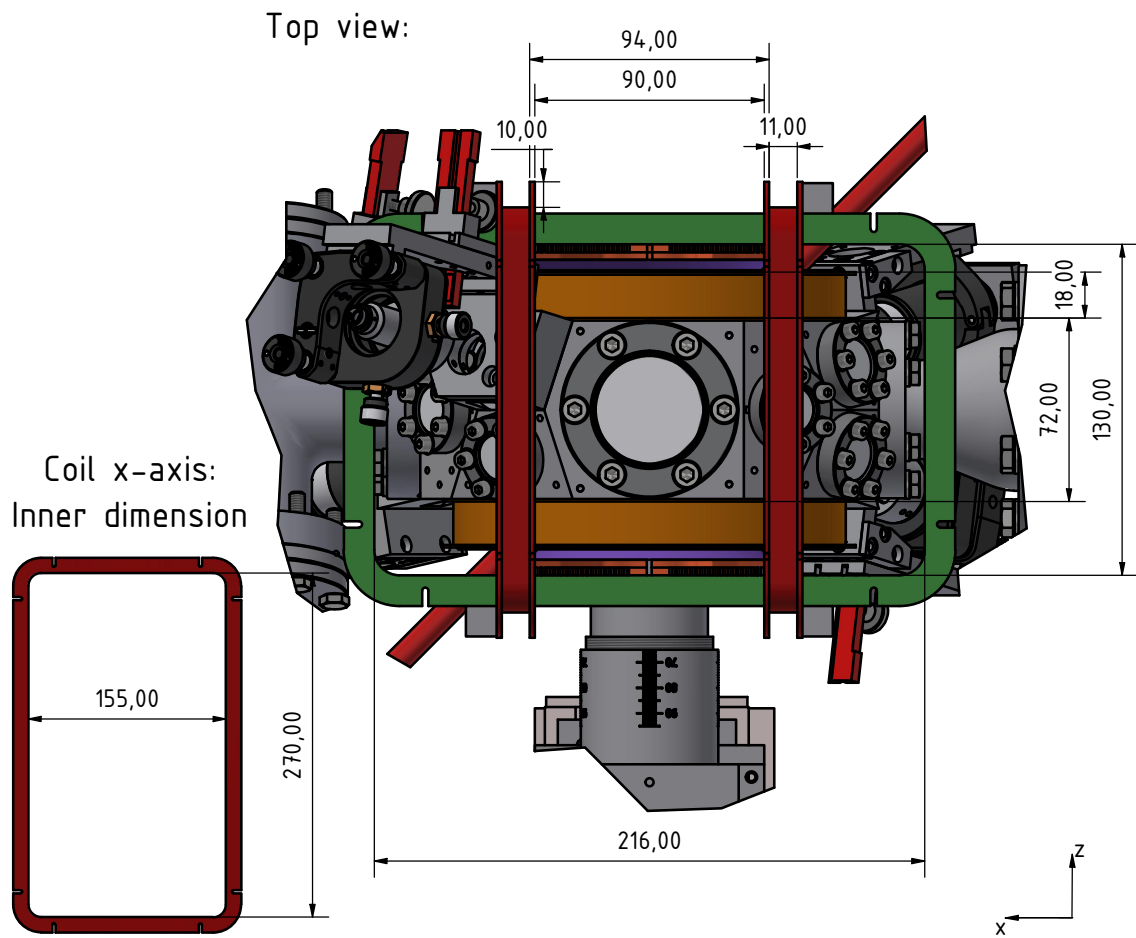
Drawing showing the top view onto the vacuum chamber giving further dimensions for the compensation and bias field coils. In addition, the inner dimensions of the coil for a homogeneous field along the x-axis (red in all drawings) are given.
